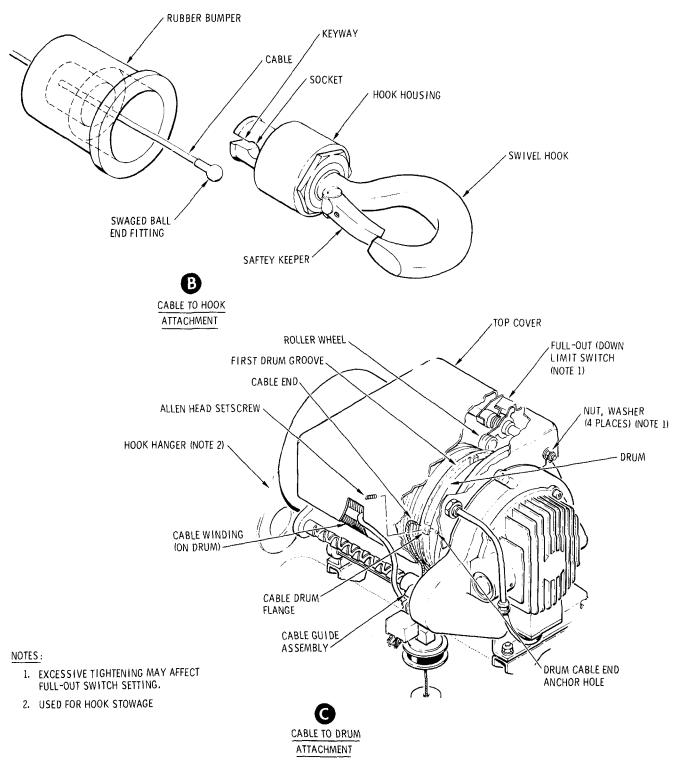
Winch cable, cable cutter, and swivel hook replacement (sheet 1 of 2)
